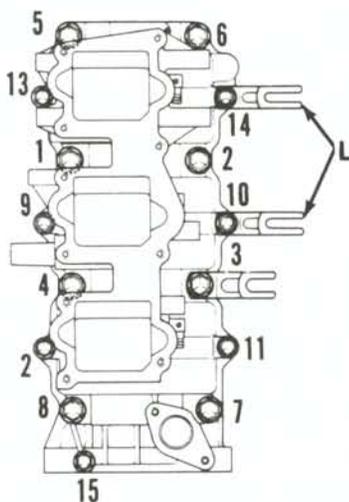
Tighten crankcase screws in sequence shown. Tighten 6 mm screws to 8-12 N·m (6-9 ft.-lbs.) and 8 mm screws to 20-26 N·m (15-19 ft.-lbs.). Make sure long clamps (L) are positioned as shown.
